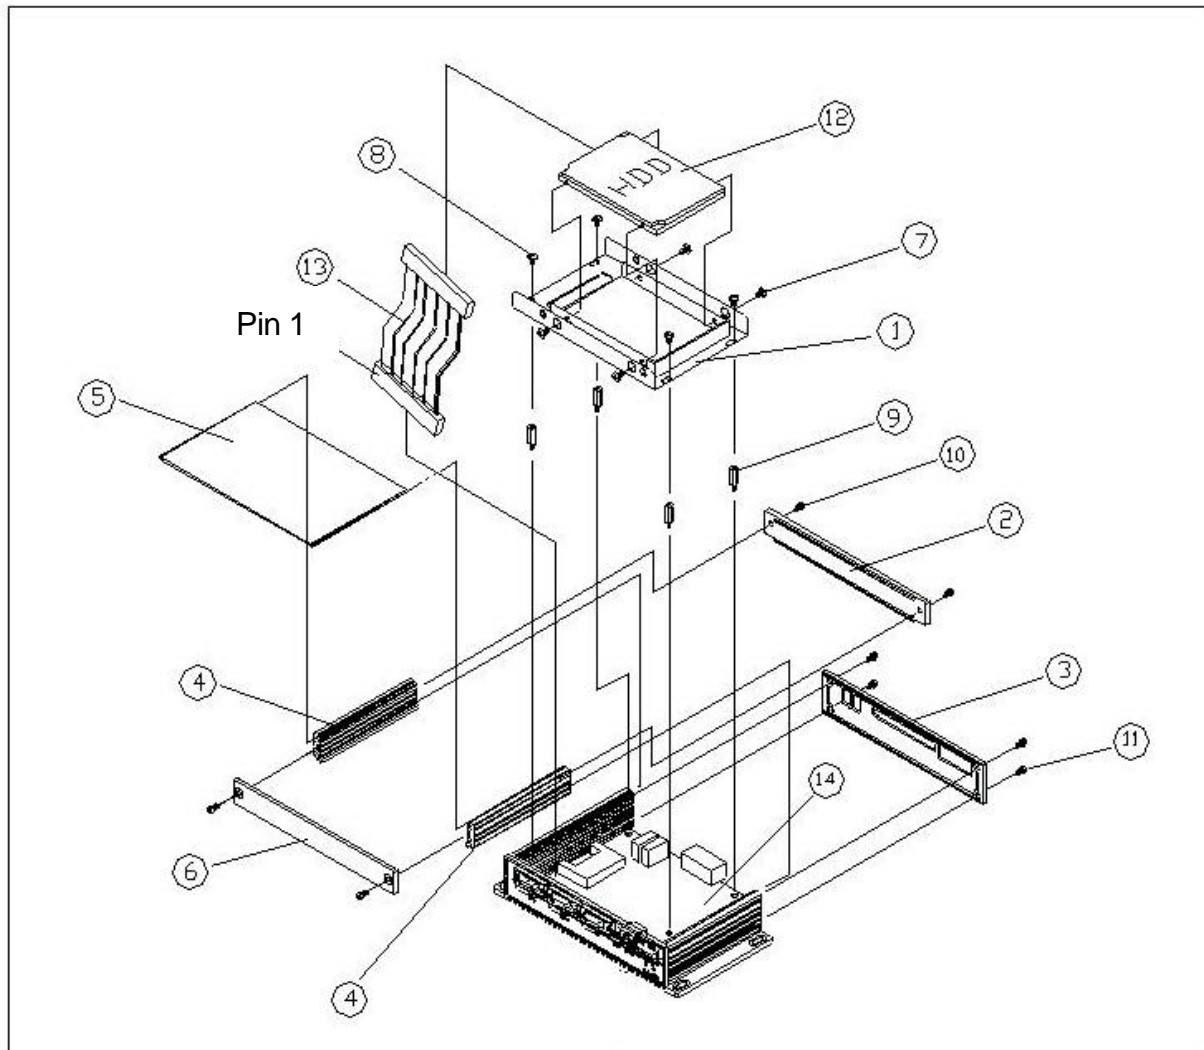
UNO-2000 Series HDD Extension Kit Assembly Diagram
